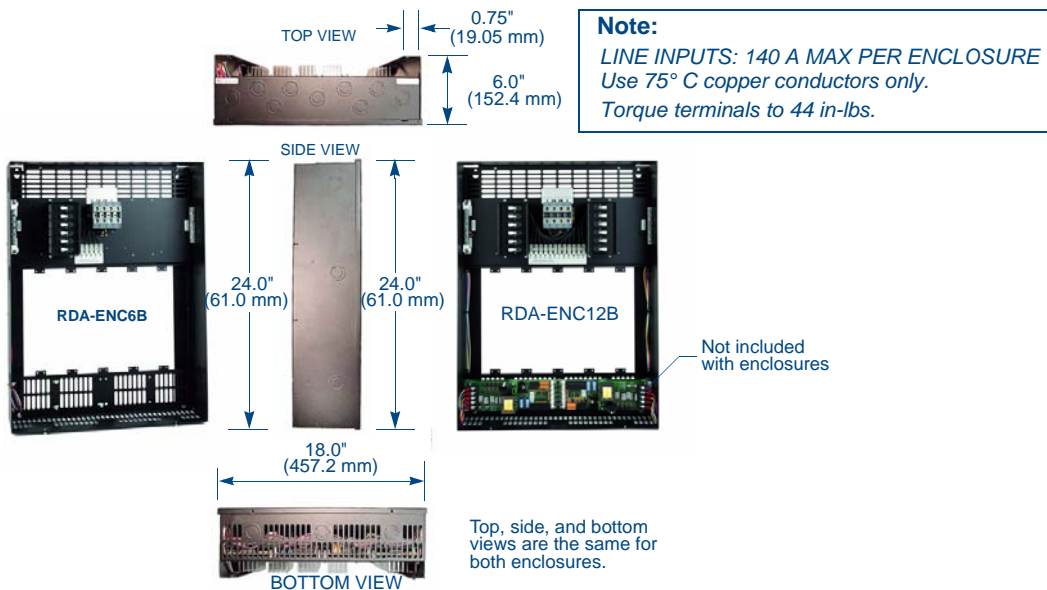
RDA-ENC6B and ENC12B enclosures and dimensions
